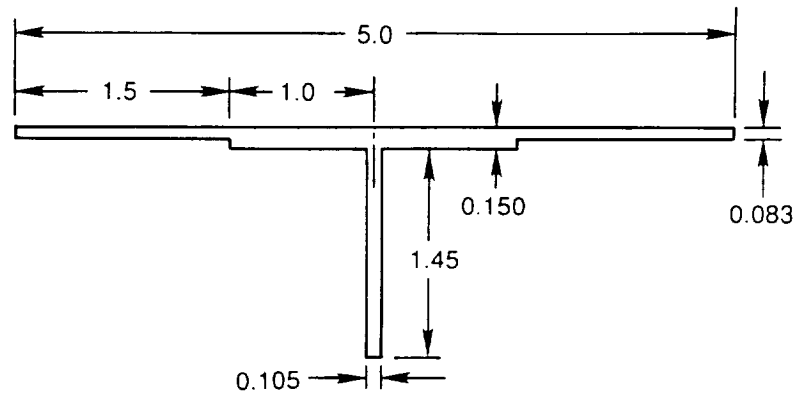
Final design for square, blade-stiffened panel. One repeating element is shown. Dimensions are in inches.
